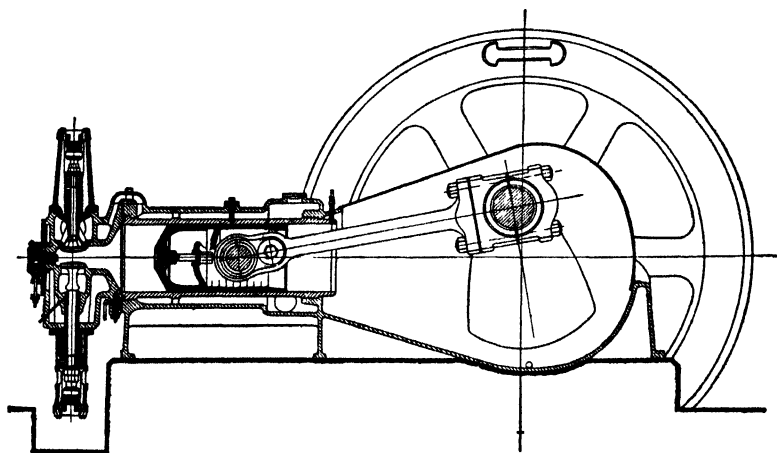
Longitudinal Section of Allis-Chalmers Engine
